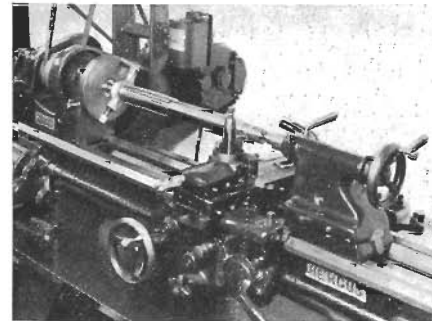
Turning a Tapered Shaft with the Taper Attachment
